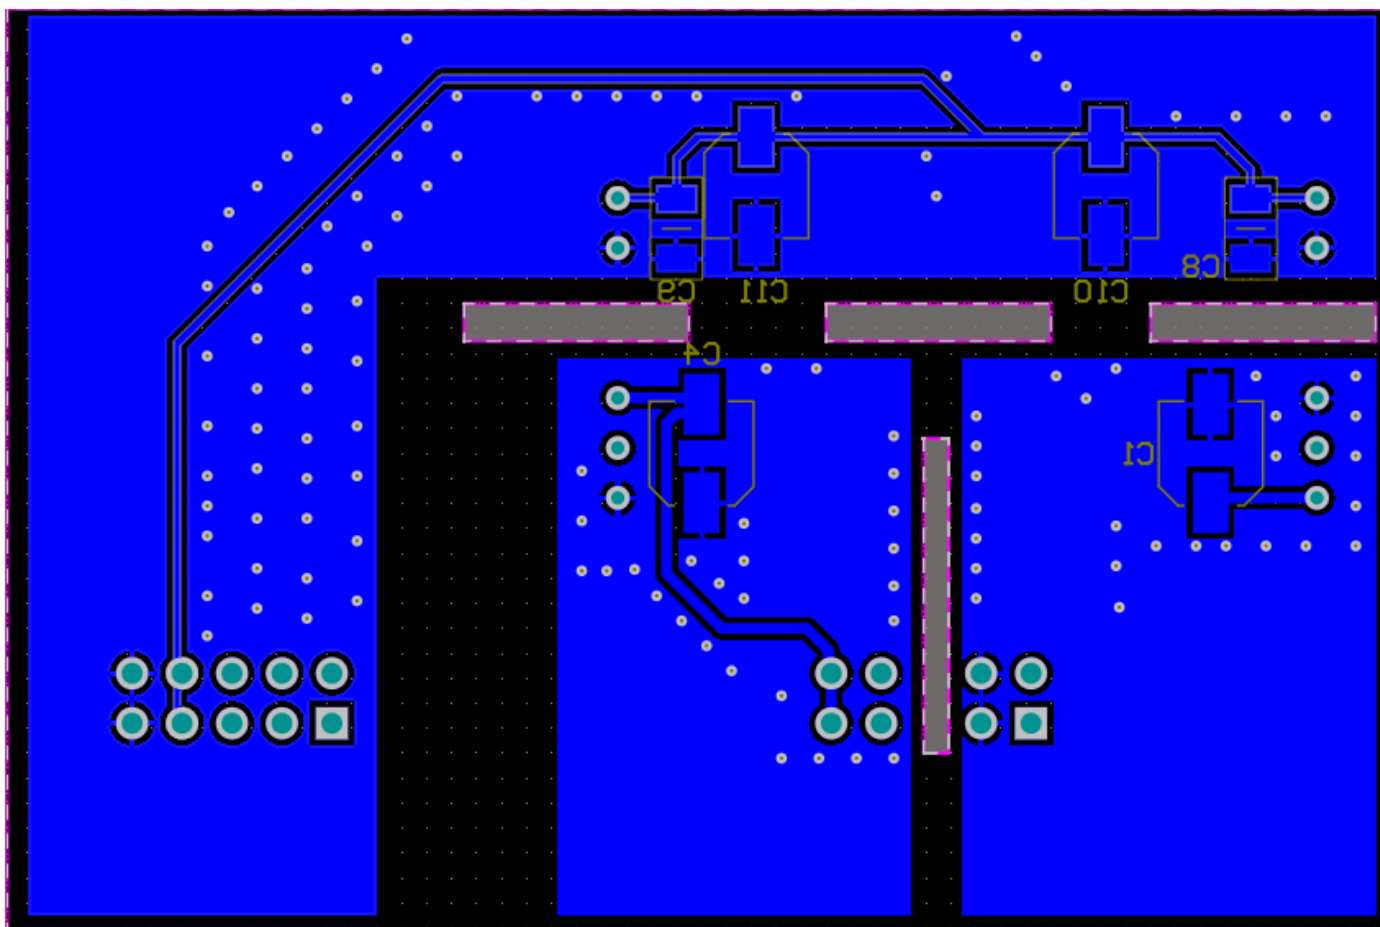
Driver PCB layout in Altium Designer: Bottom View
